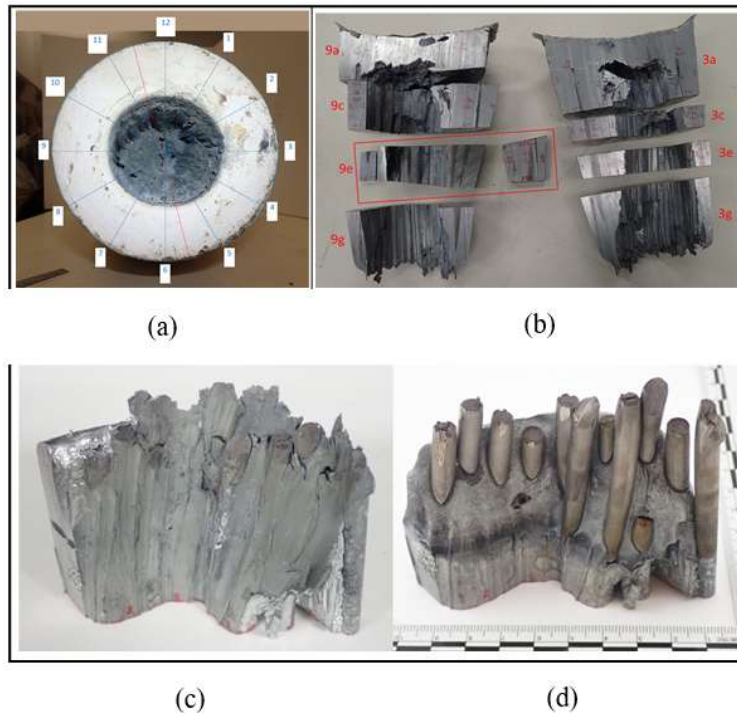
Sectioning plan for the socket (a), sectioned zinc (b), section of zinc with encased wires before (c) and after (d) removal of zinc via dissolution in acid.
